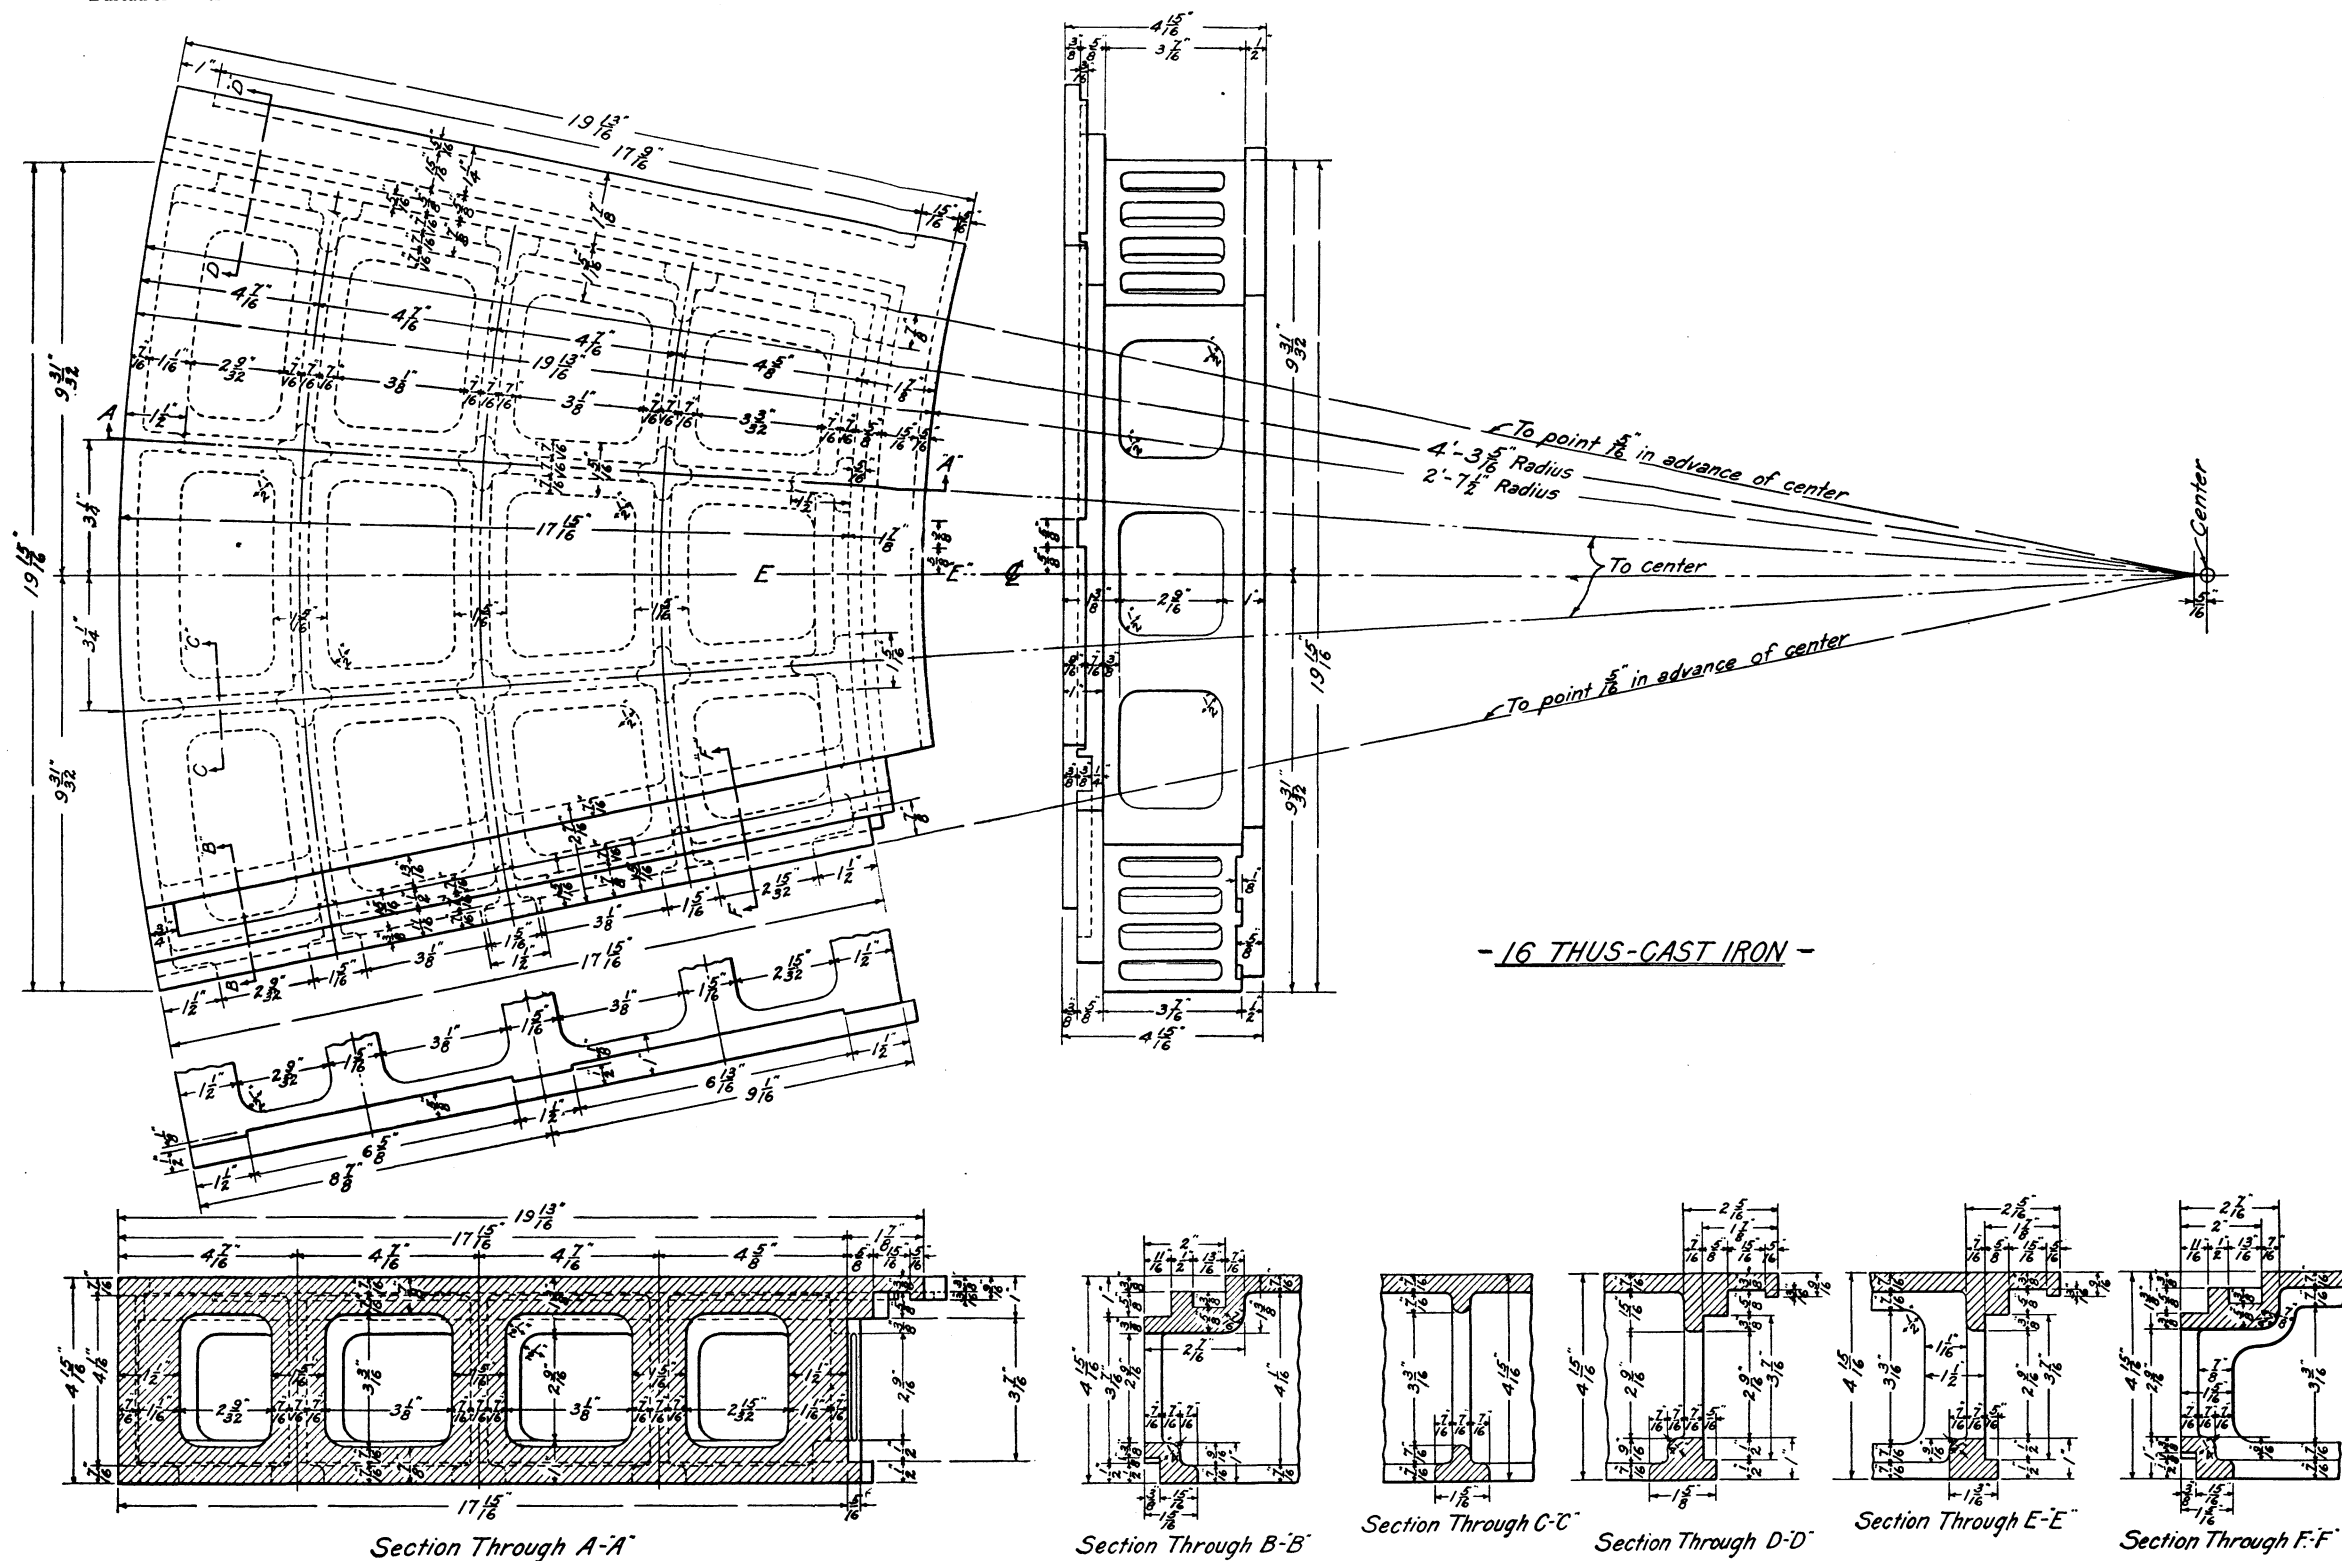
Details of plates forming outer ring of cast-iron hearth, Bowie-Gavin furnace
